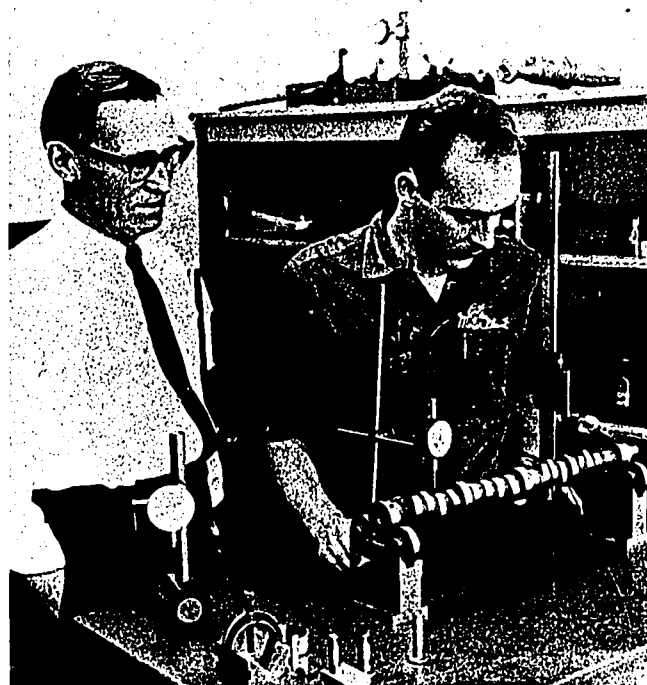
The industrial engineer gets standard measuring devices for production.
